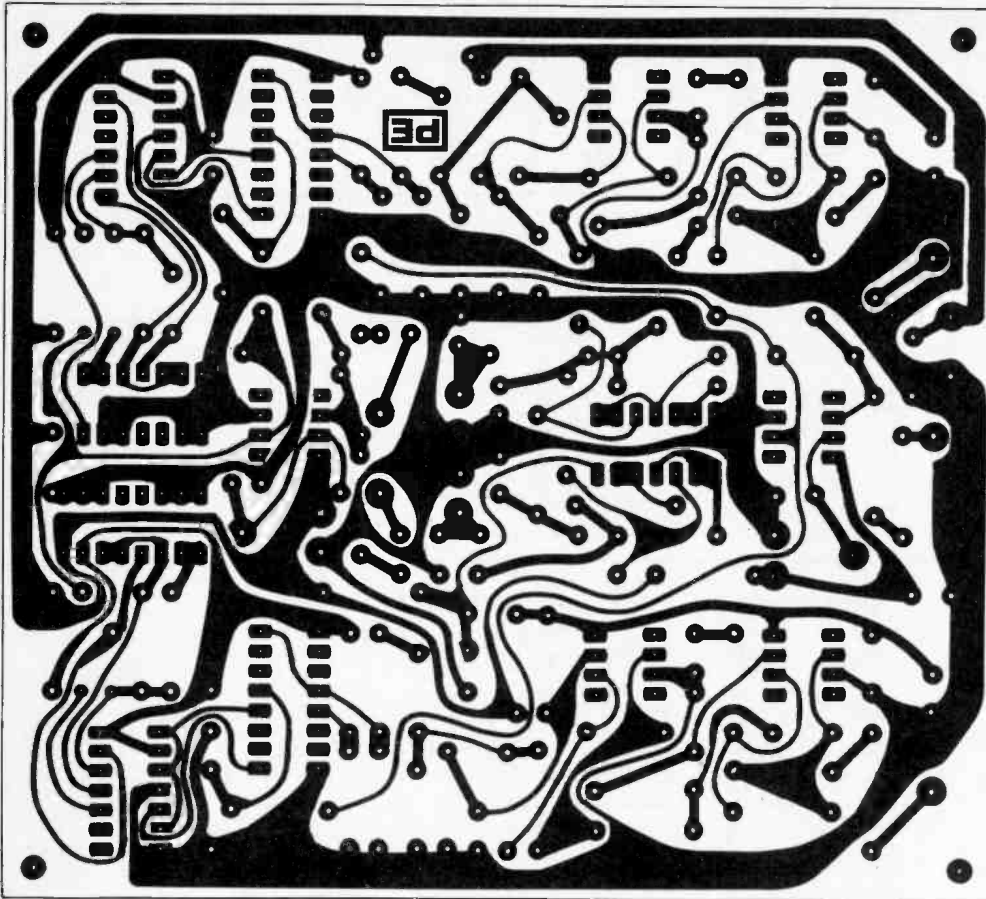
Etching and drilling details of the Chorus Generation printed circuit board
